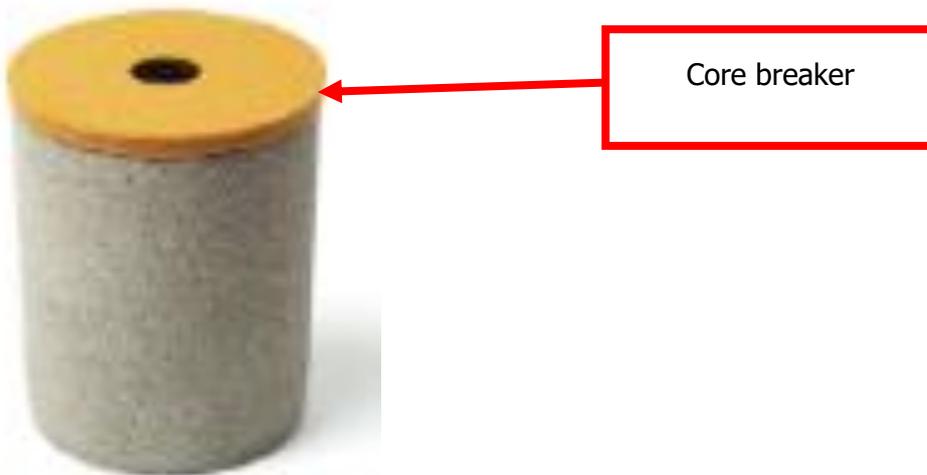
Cylindrical exothermic sleeve with a core breaker.
